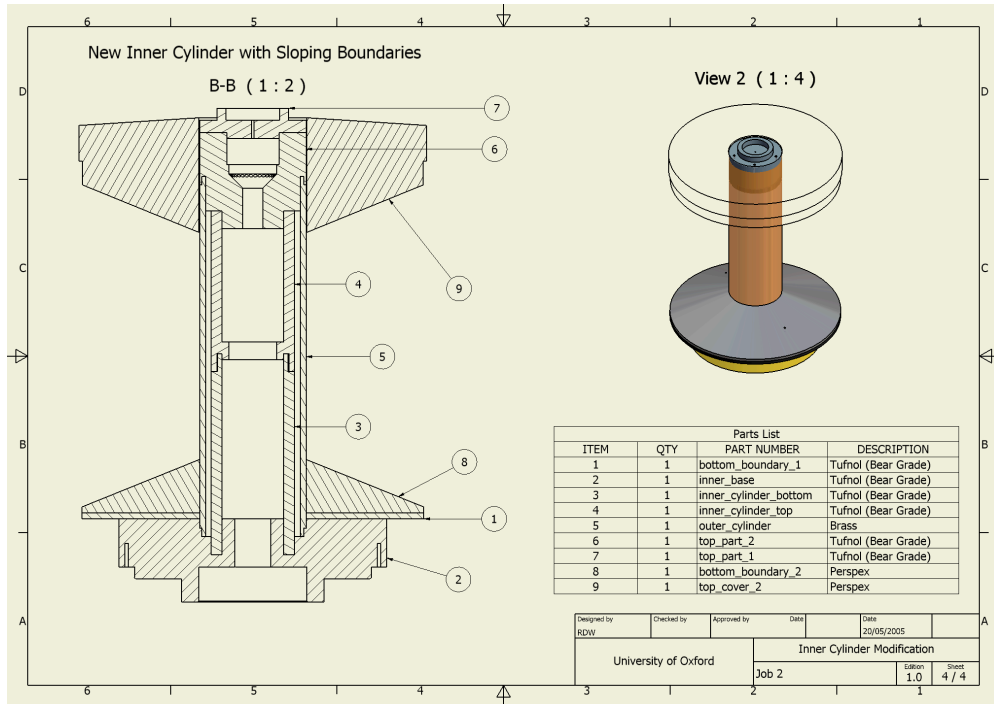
Technical drawing of the modified inner cylinder for the sloping boundary case.
